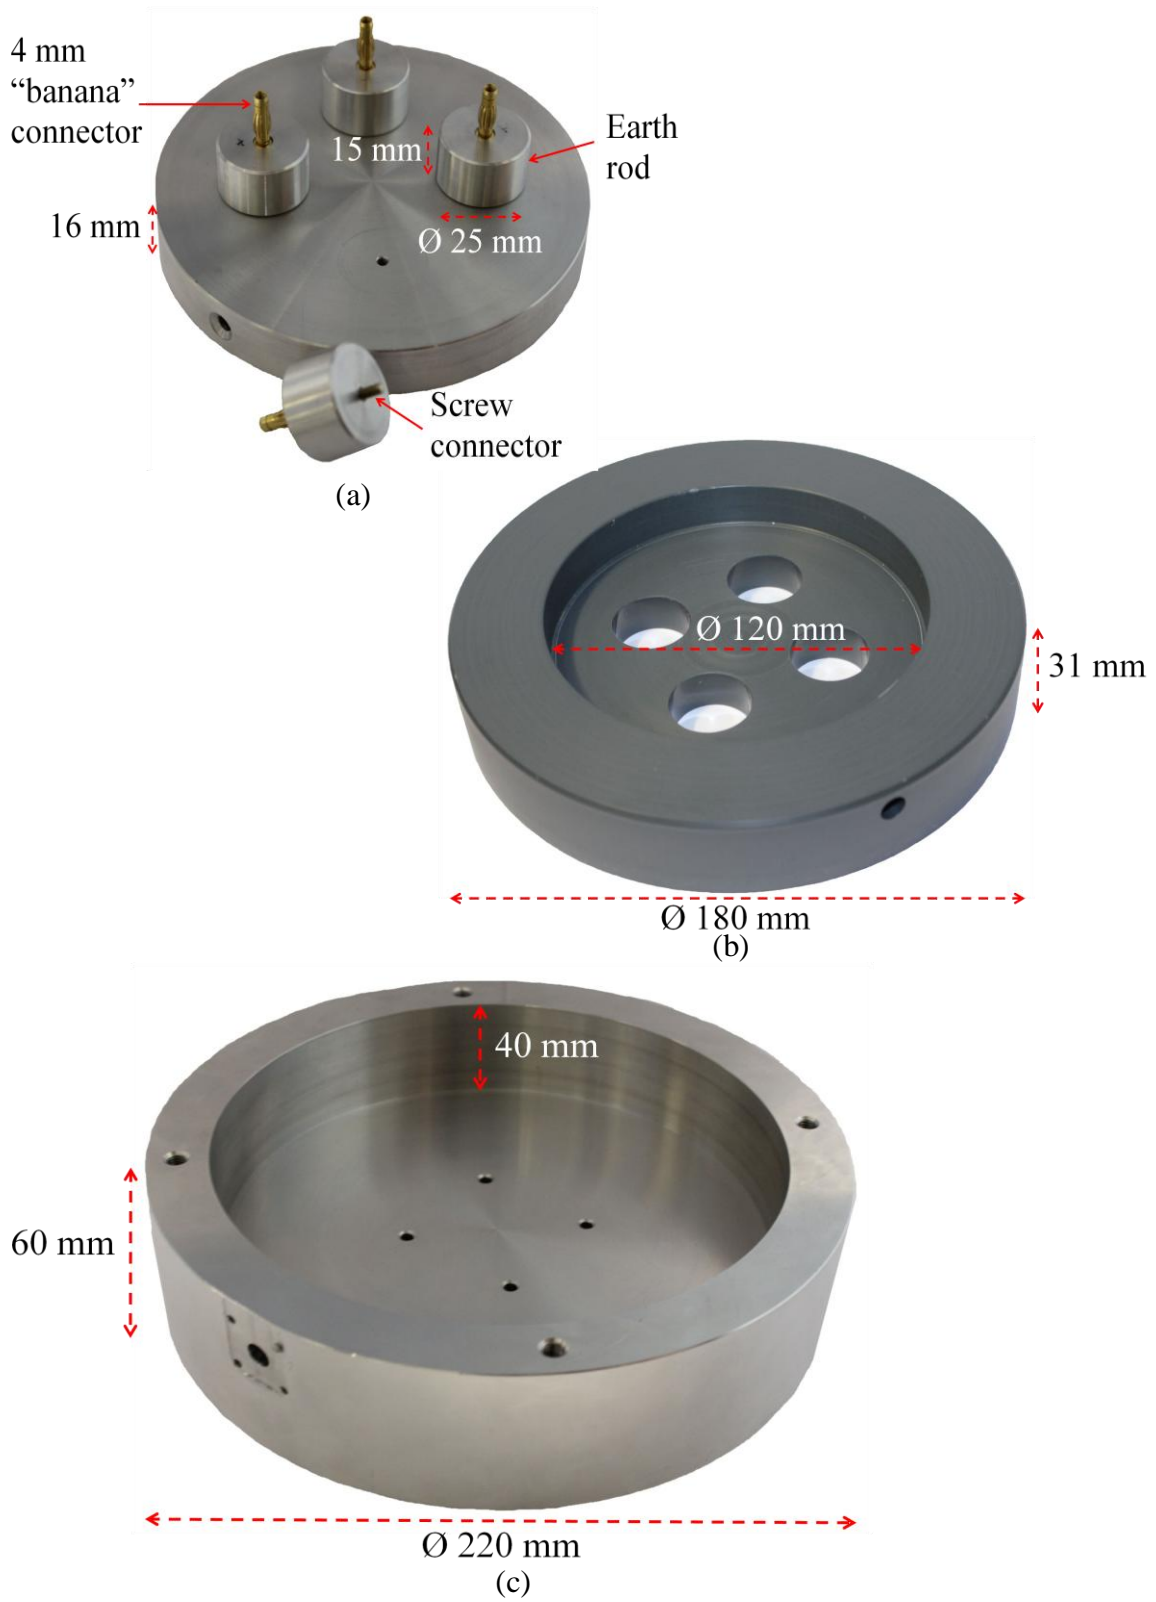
The internal parts of the improved novel external disc-type UHF PD sensor: (a) aluminium disc with earth rods, (b) PVC part, and (c) sensor cover.
